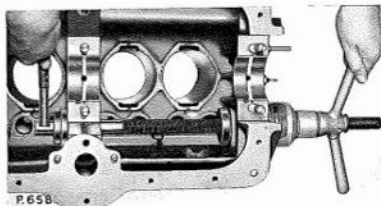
Removing the centre camshaft bearing, using the Churchill Tool 32 in conjunction with the adaptor sets R.G.32-3 and R.G.32-4
